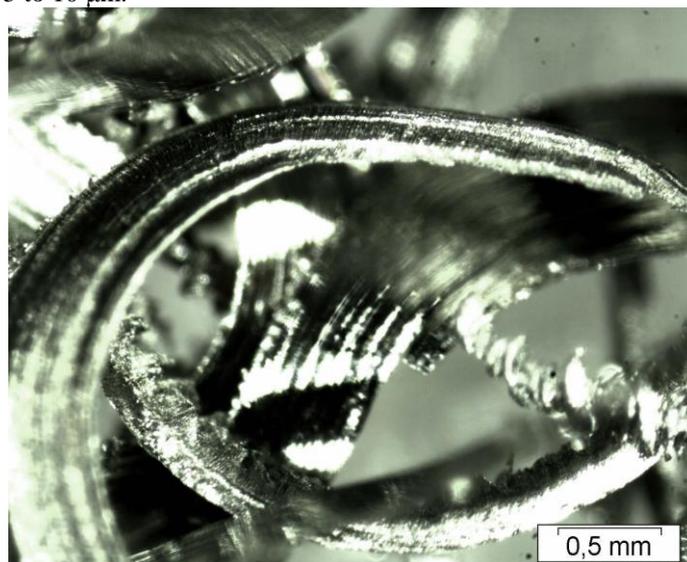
Stainless steel duplex UNS S31803 in the form of machining chips.
